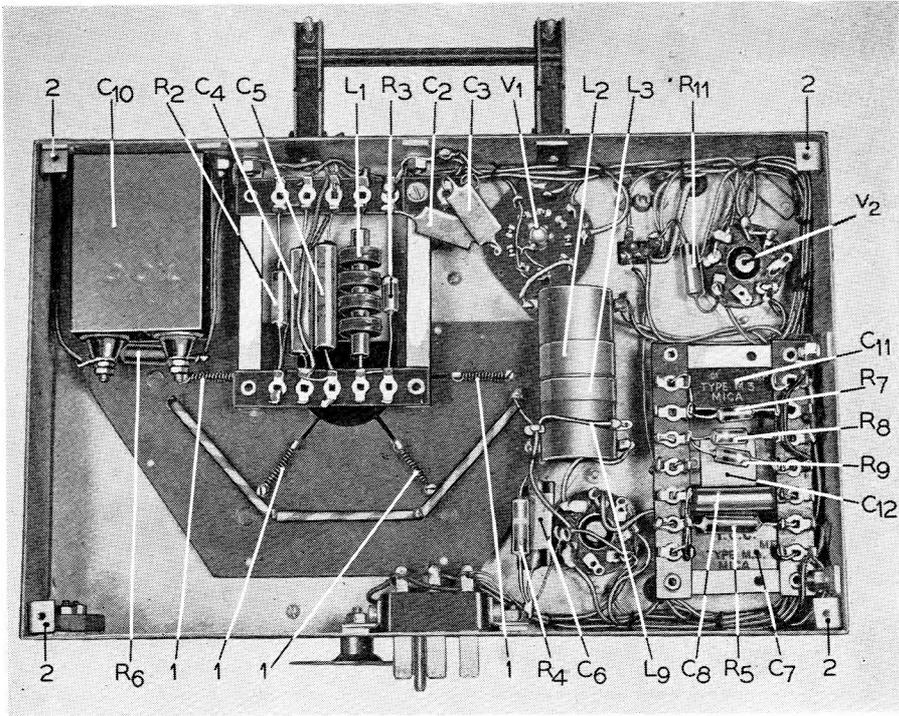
TRANSMITTER UNIT, UNDERSIDE OF CHASSIS
